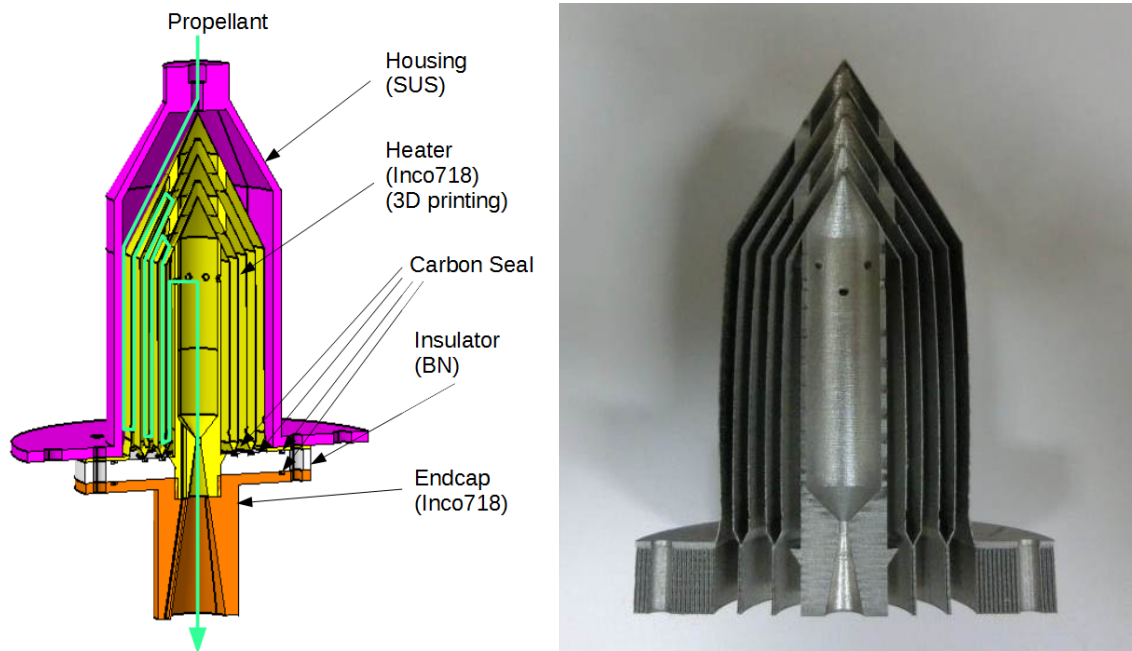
Metal 3D printed resistojet by Nakata and Kinefuchi [50]: design (left) and printed component cut in half (right).
